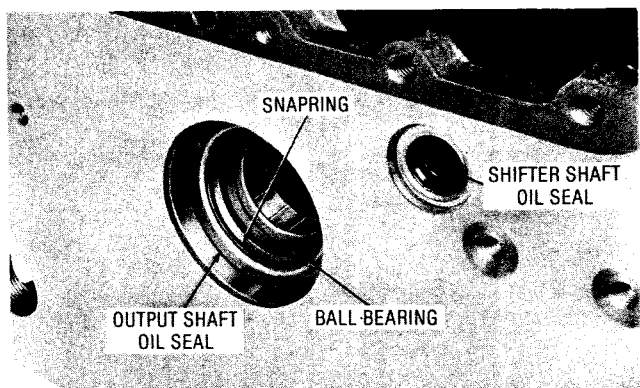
Output shaft front bearing and sealring (-1 models)
